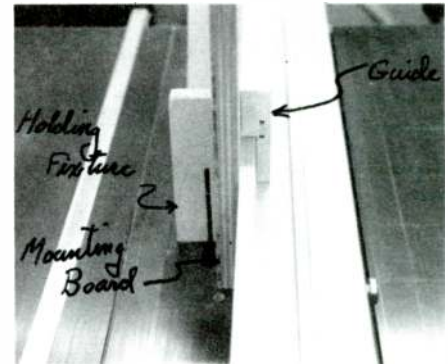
Arrangement of guide, holding fixture, and mounting board for corner spline jig.
